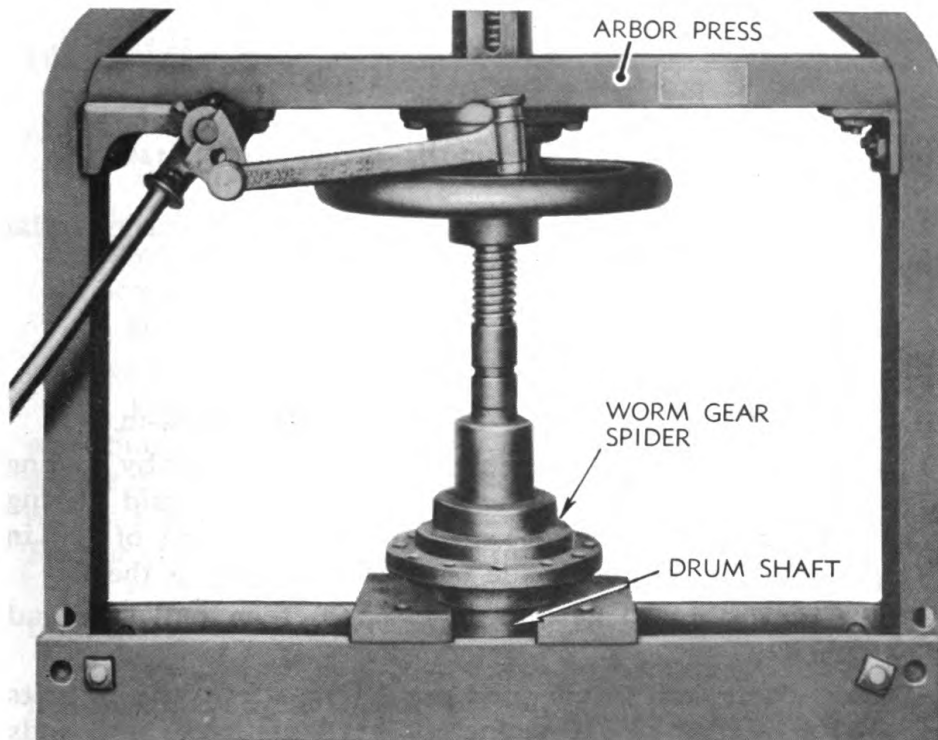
Removing Worm Gear Spider from Drum Shaft
